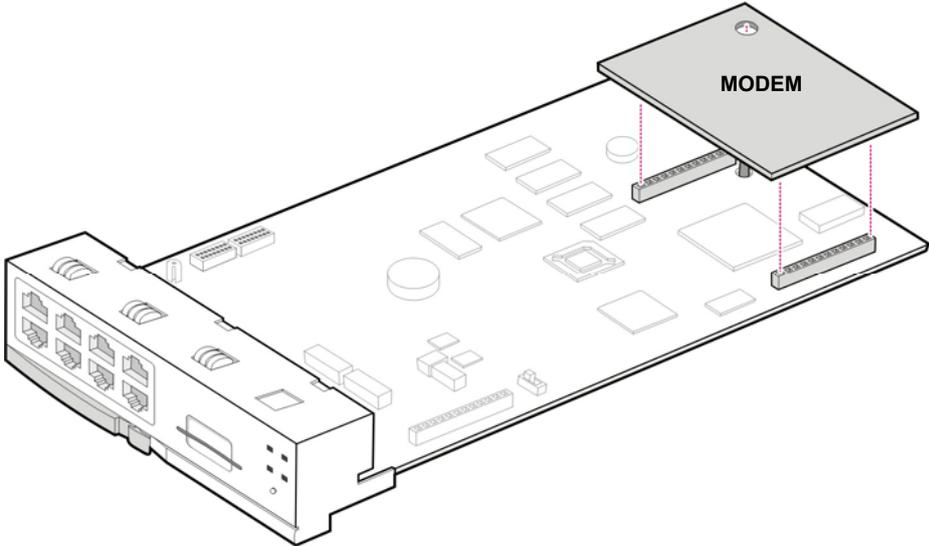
Mounting a Modem Board on MP10/10a/11 Boards
